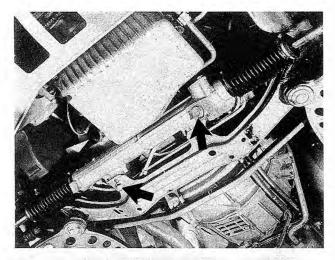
Mounting bolts (arrows) and self-locking nuts mount steering gear to front suspension subframe. Always replace self-locking nuts.
